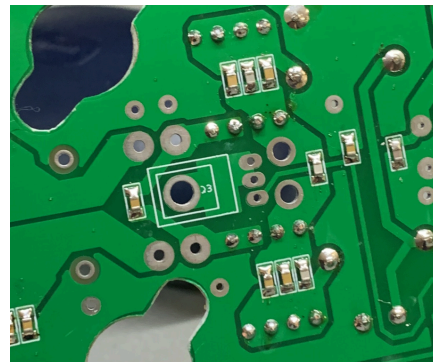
Close view of the bottom of the PCB, COG/NPO capacitors
